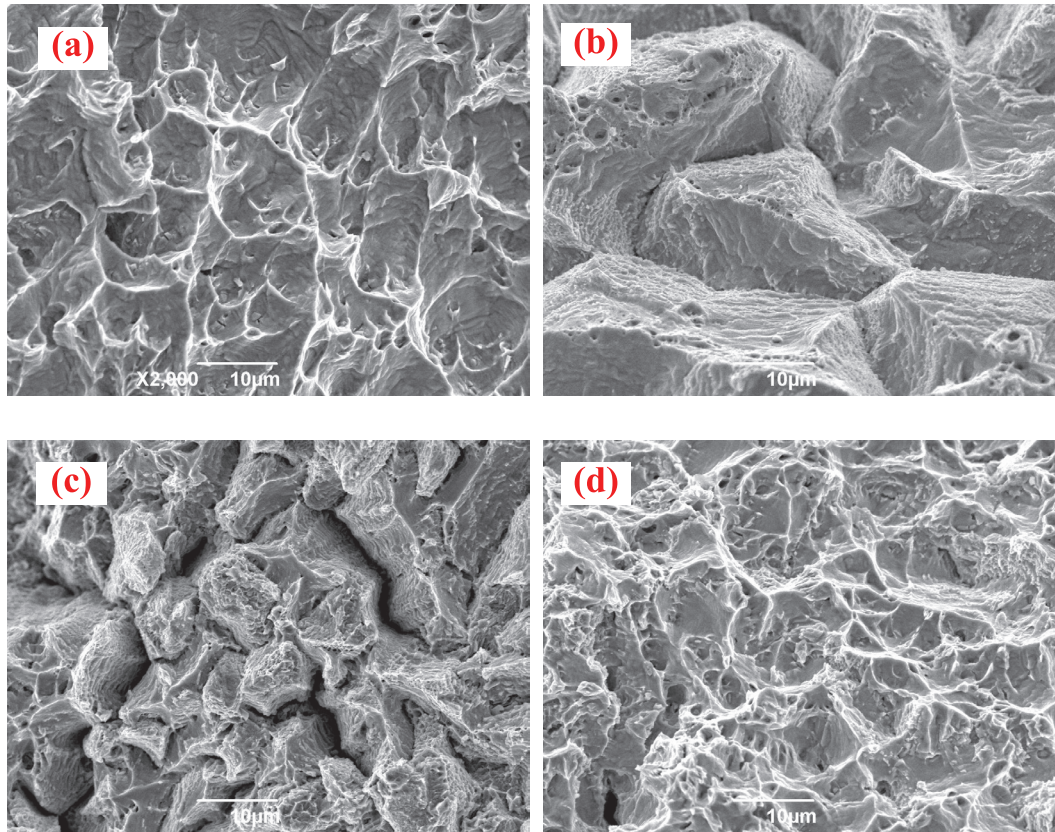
SEM fractographs of tensile fracture: (a) aging 0 kh, (b) aging 2 kh, (c) aging 4 kh, (d) aging 8 kh
